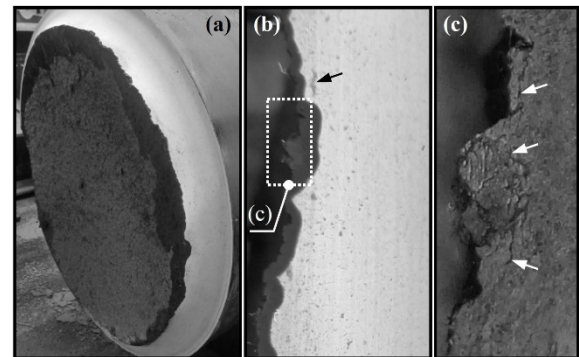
PT result of part A, (a) appearance, (b) cracks and micro-holes, and (c) defects near fracture surface.
